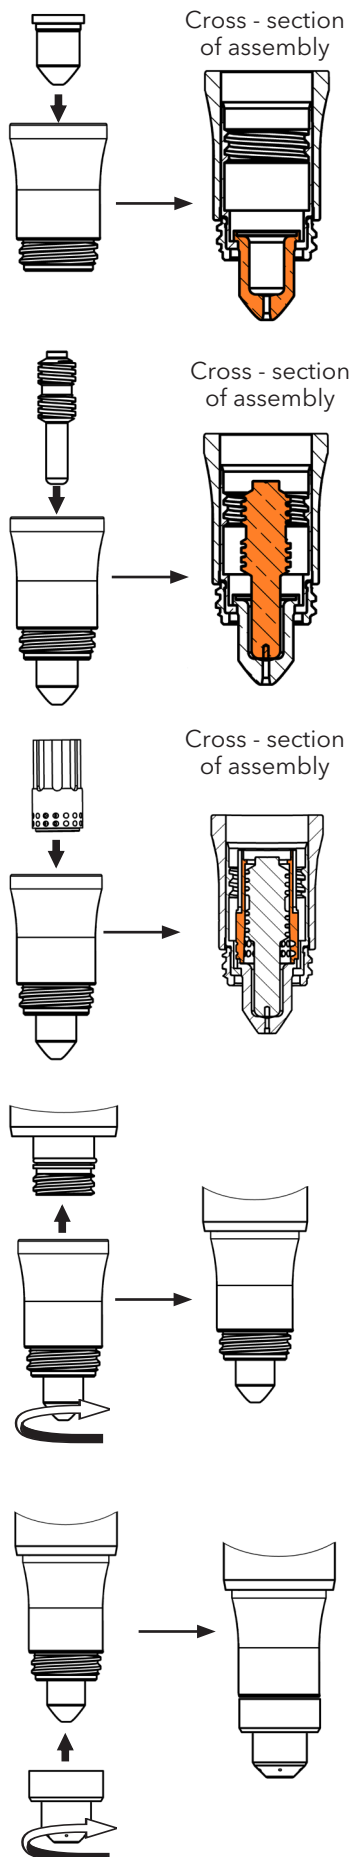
FHT-EX[®]105TT cutting torch consumables
